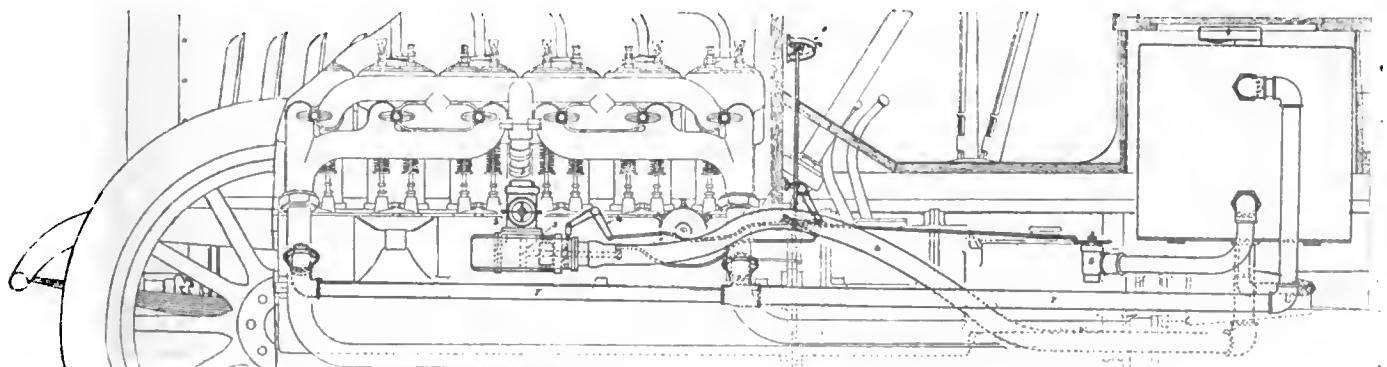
Diagrammatic scheme showing the manner in which the generator is used and piping connecting to motor.
